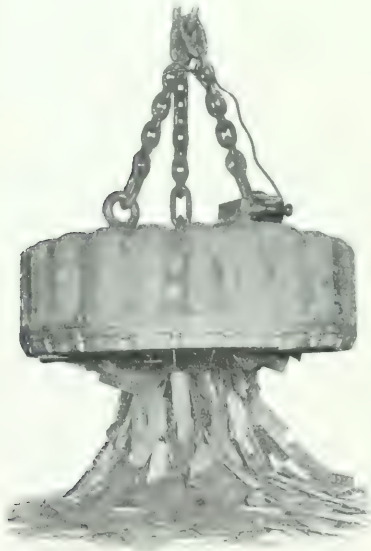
LIFTING MAGNET FOR PIG IRON AND SCRAP.
